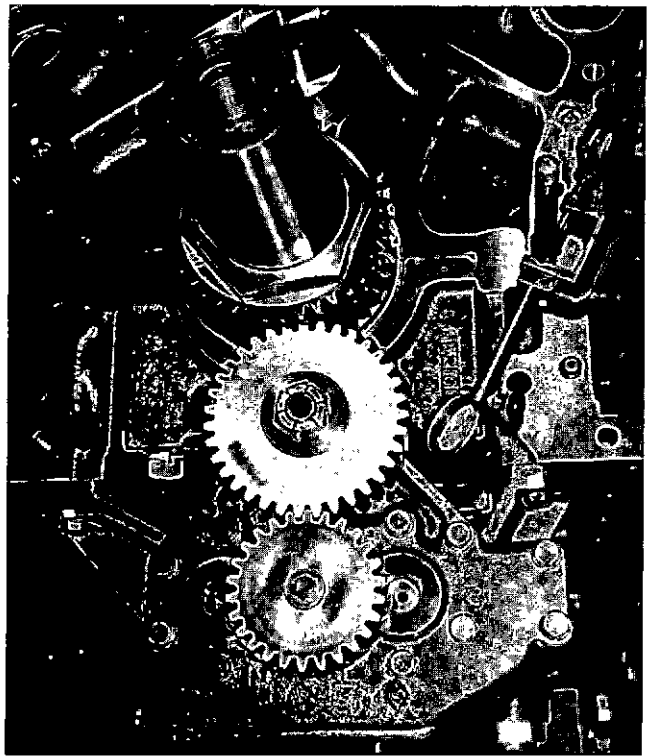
, V414130. Check lubricating oil pump gear backlash
